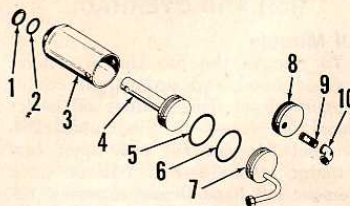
Exploded view of model H30 or J30 hydraulic lift cylinder used on some tractors. Items 8, 9 and 10 are used on model H30 cylinder.
